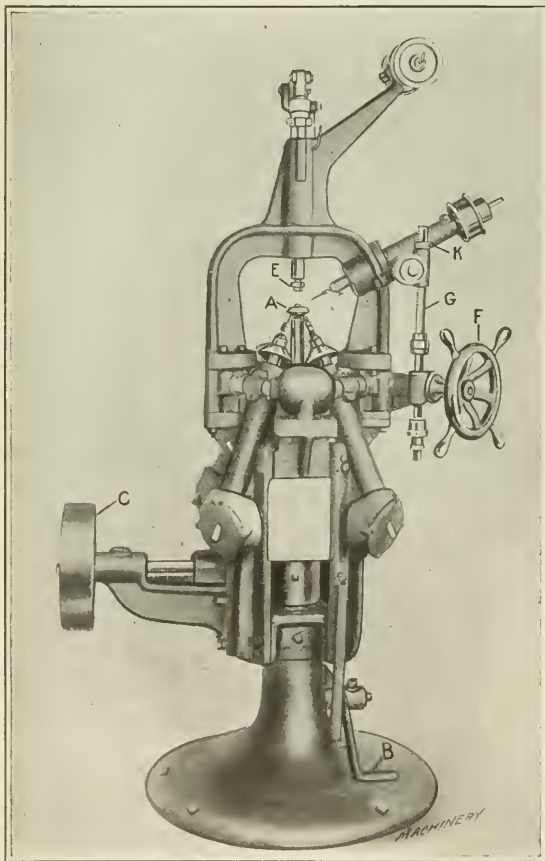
Special Five-spindle High-speed Drilling Machine for Shrapnel Fuse Closing Cap
